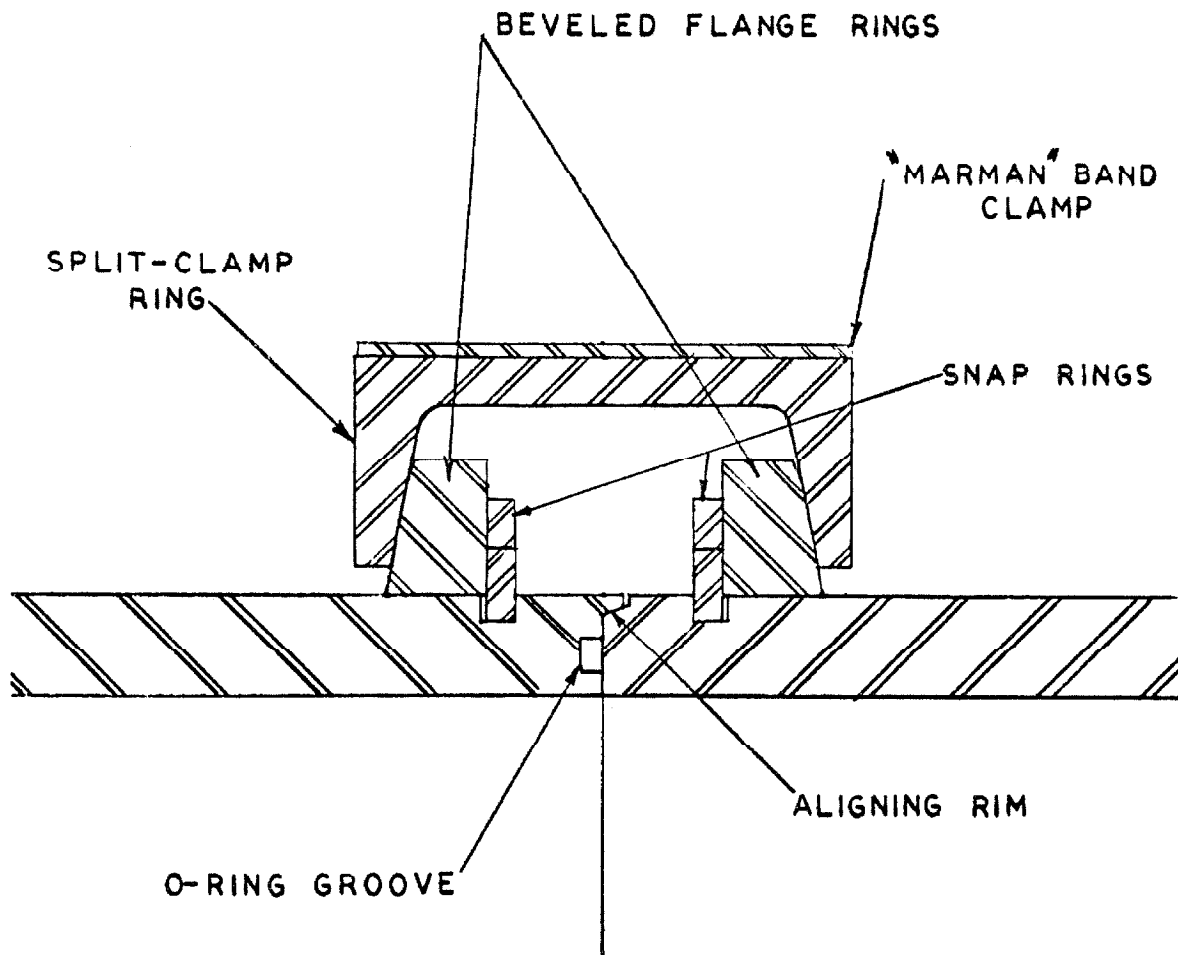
SECTIONAL VIEW OF TYPICAL JOINT BETWEEN
